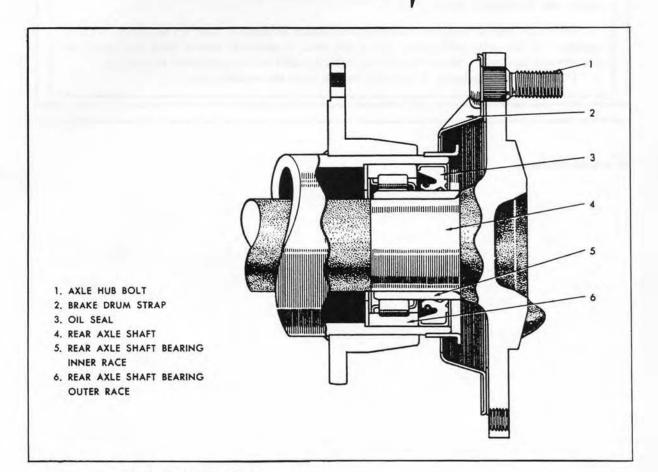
Axle Shaft, Bearing & Oil Seal
